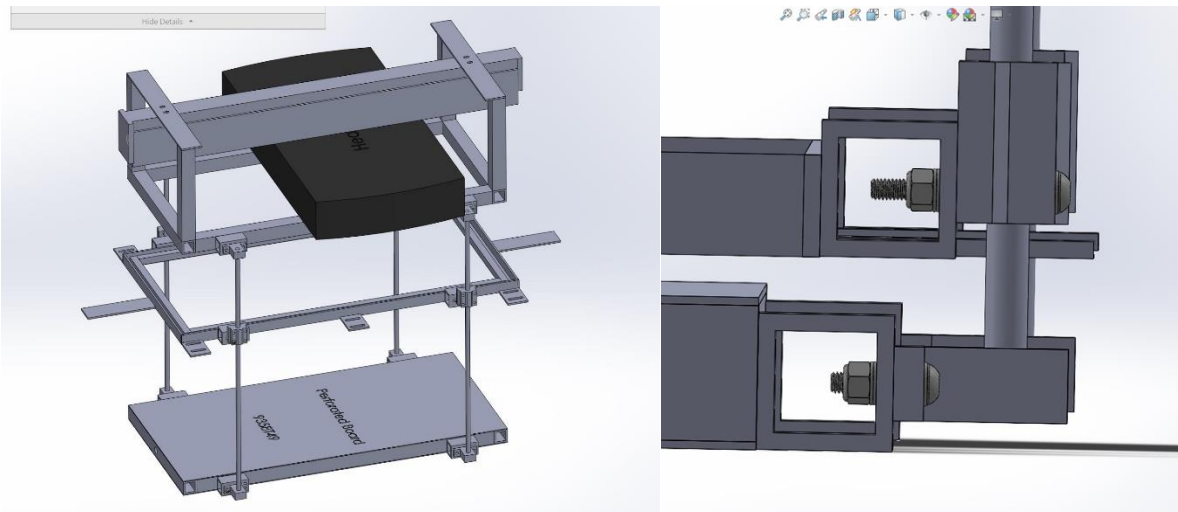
Final Thermoformer Assembly and Bolted Connections.
